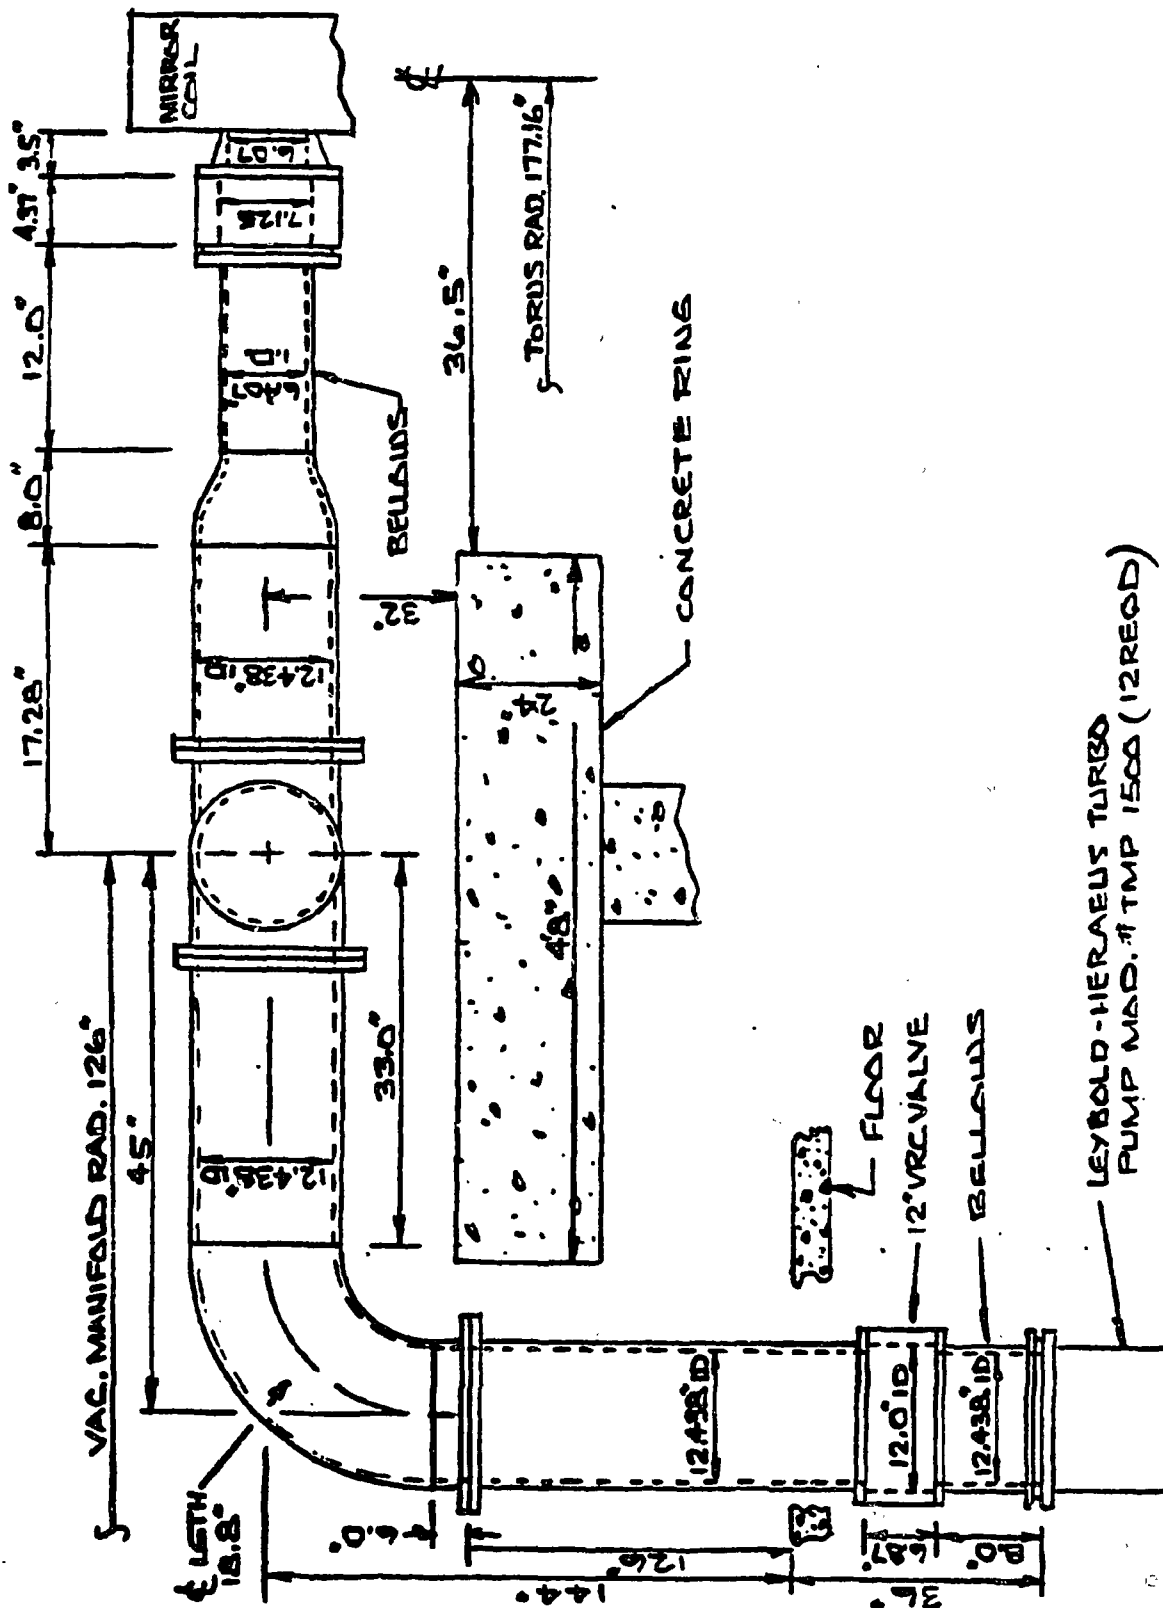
11C DEVAR TMP 1500 SYSTEM WITH 12.44 INCH MANIFOLD
